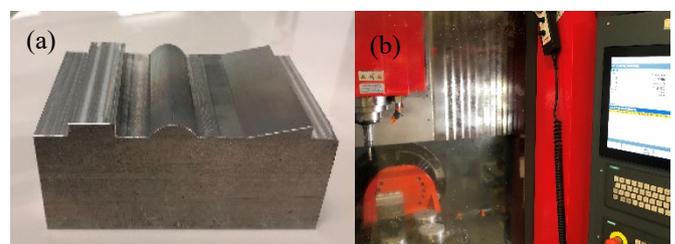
(a) Pre-machined stock material; (b) EMCO machine setup
